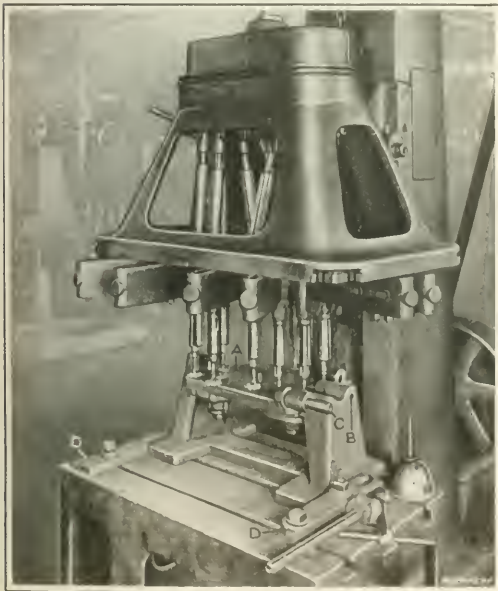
Baush Multiple-spindle Drill equipped for drilling Ten Holes in Flange of Timing Gear-cases—Note Means for turning over Jig Plate and sliding Entire Fixture out from under Spindles for loading
